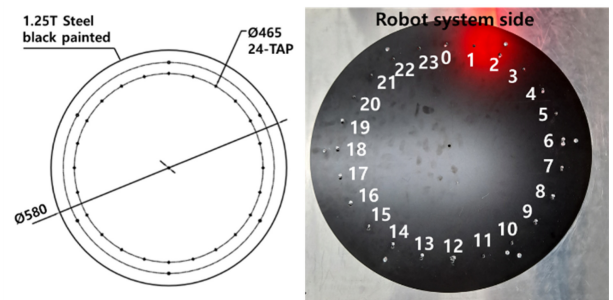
Steel plate with bolt hole positions (left : engineering drawing, right : manufactured goods)
